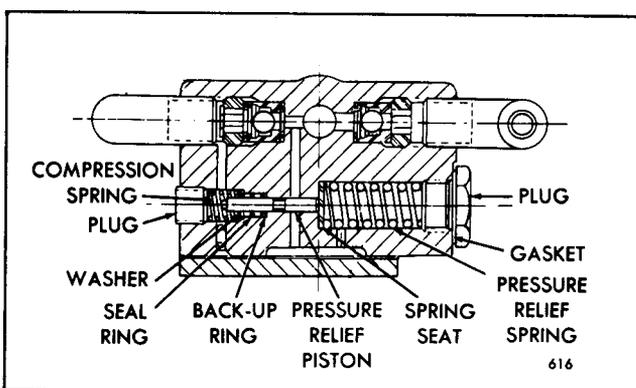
Engine-Driven Hydrostarter Charging Pump Pressure Relief Piston Assembly
